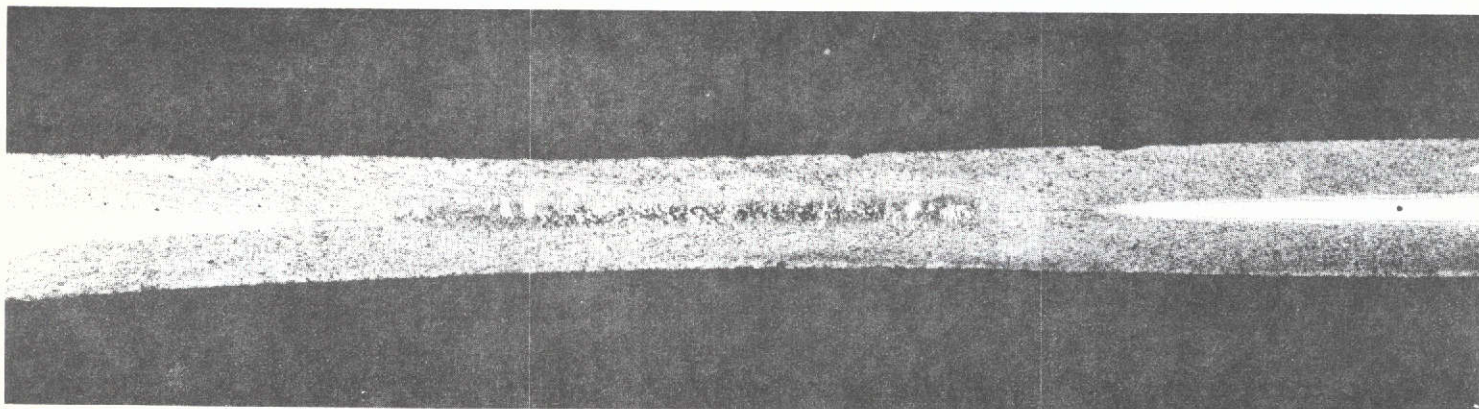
Attempted Spotweld Without Hole in Braze Tape
